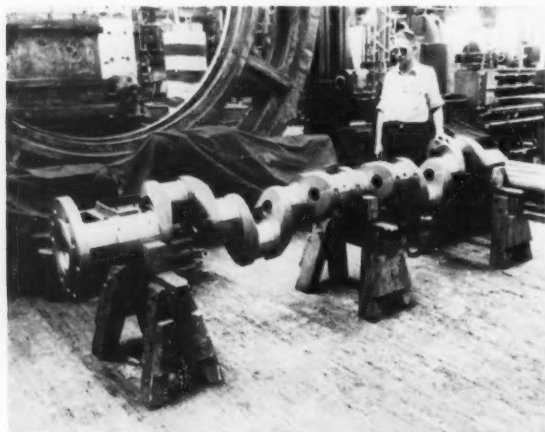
Typical Meehanite® Crankshaft produced for a 600 h.p. Diesel engine.
